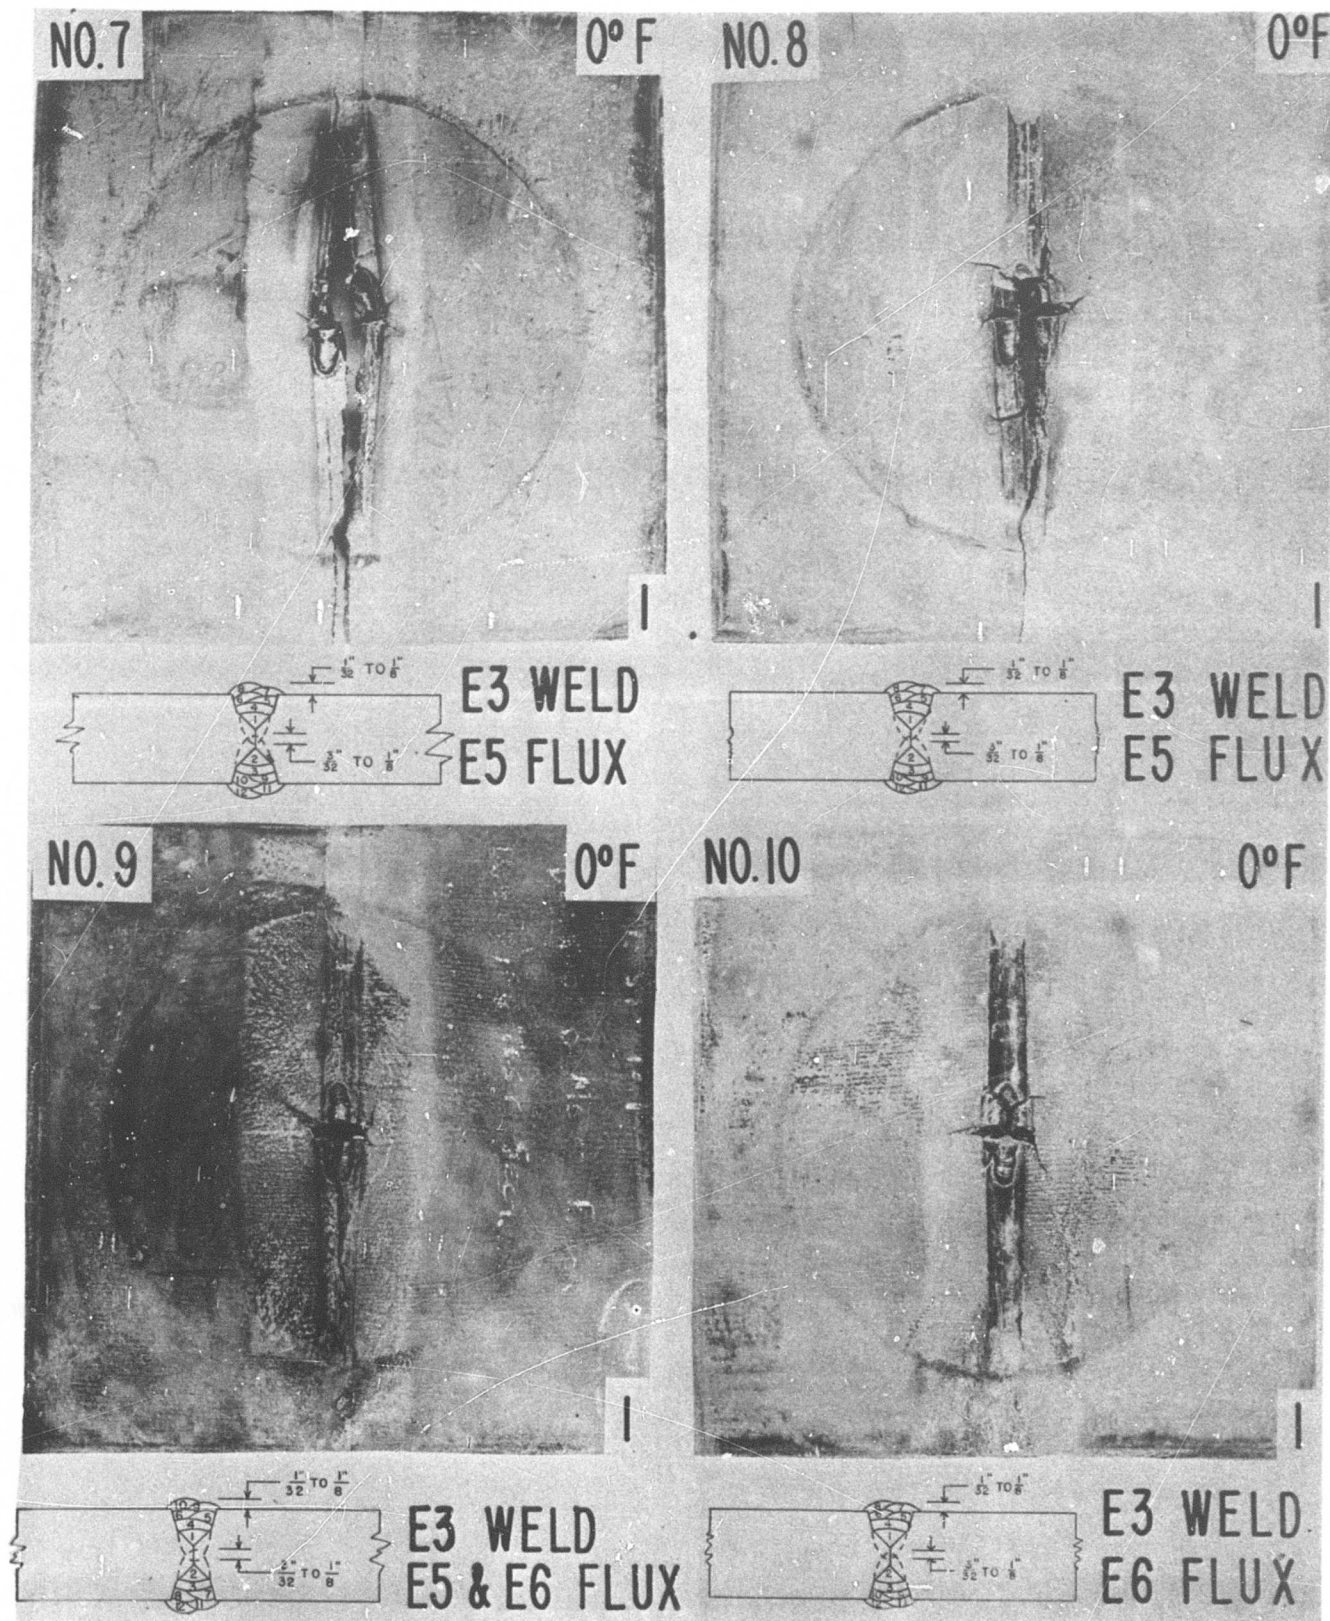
Explosion-bulge test fracture characteristics of submerged-arc weldments fabricated by MINSY. All samples modified with crack-starter weld.
